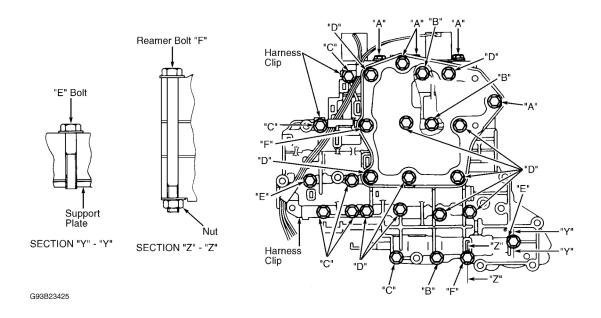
Identifying Valve Body Bolt Locations Courtesy of NISSAN MOTOR CO., U.S.A.
